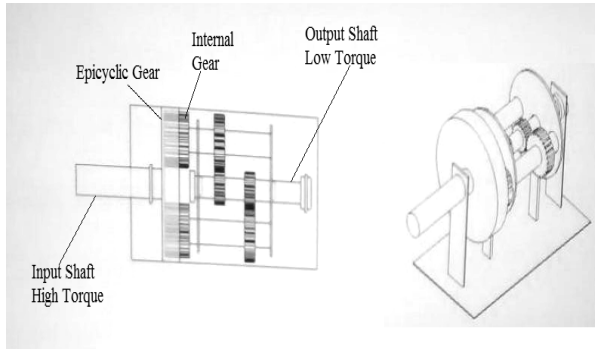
LAYOUT OF ECLIPSE GEAR BOX
